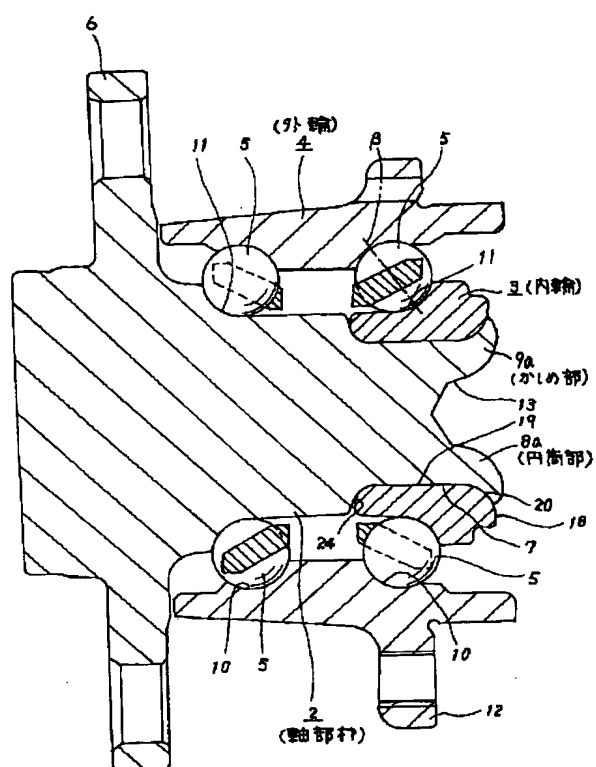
The fragmentary sectional view shown in the condition before closing and extending the toe of shank material.
